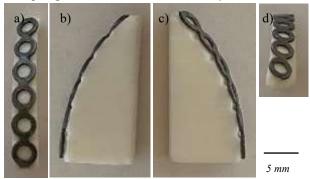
Four viewing perspectives of a test CMF plate placed against a 3D printed test object showing good fit across the entire surface.
